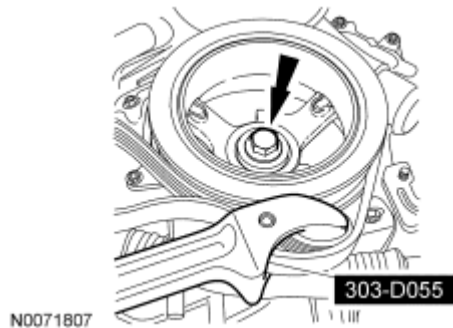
Removing Crankshaft Pulley Bolt & Washer Using Strap Wrench
